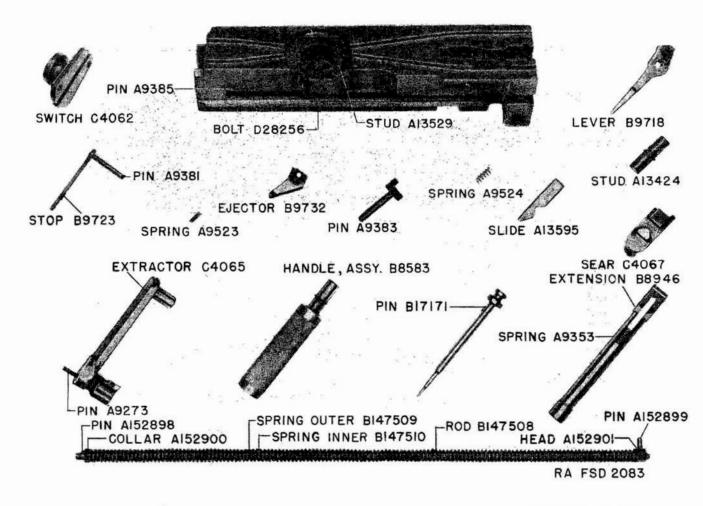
BROWNING MACHINE GUN, CAL. .50, M2, AIRCRAFT - BOLT GROUP - PARTS
